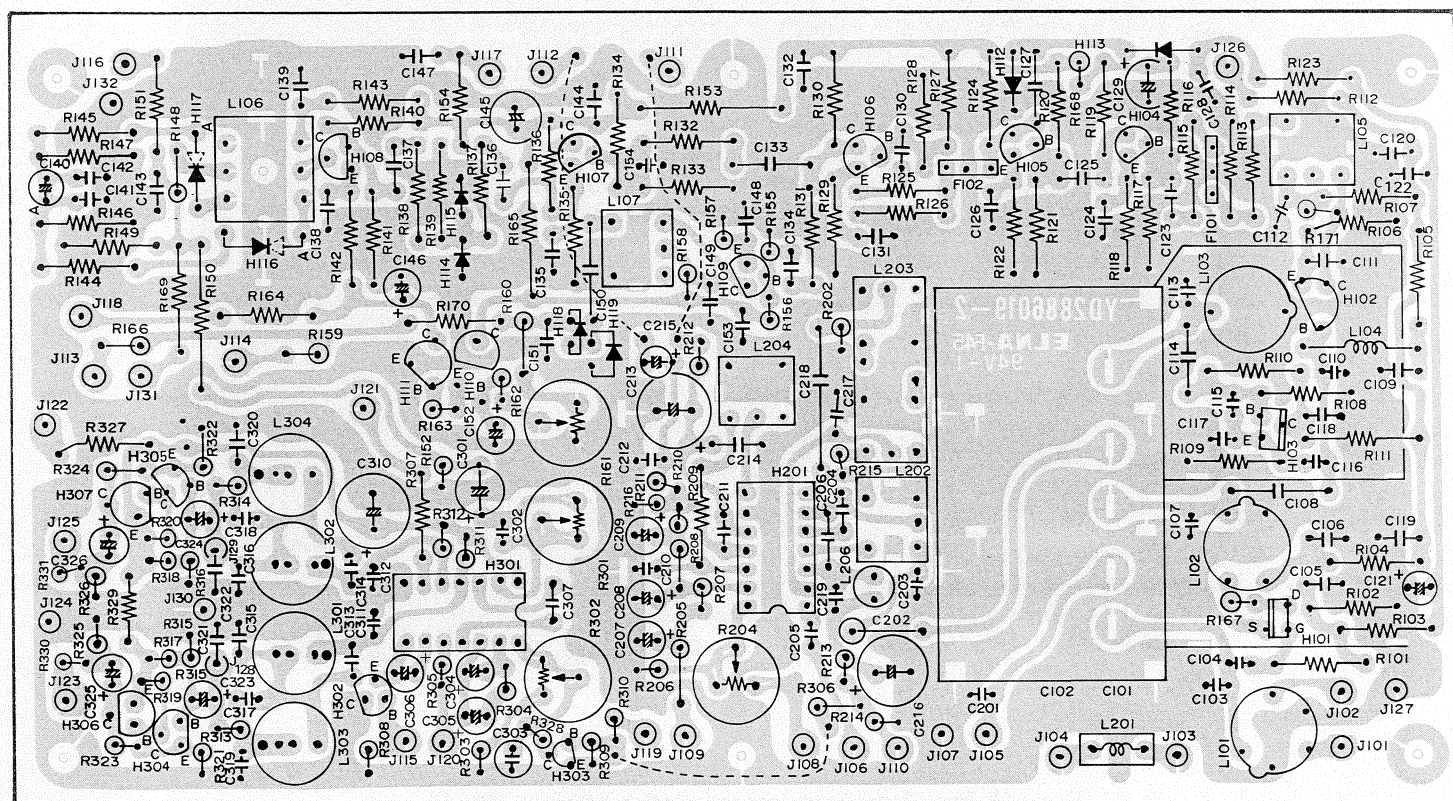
FM/AM Tuner Assembly (P100) Component Locations
